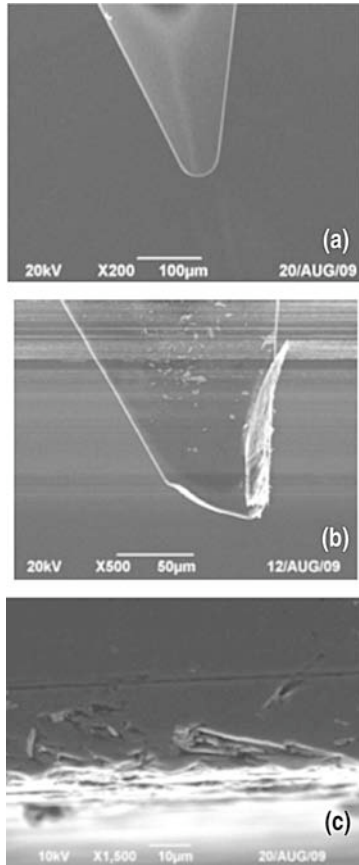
Tool wear from machining Be seen in the difference between (a) a new tool and (b) a worn tool. (c) Bulk defects in machined Be must be understood to achieve a good surface finish.
